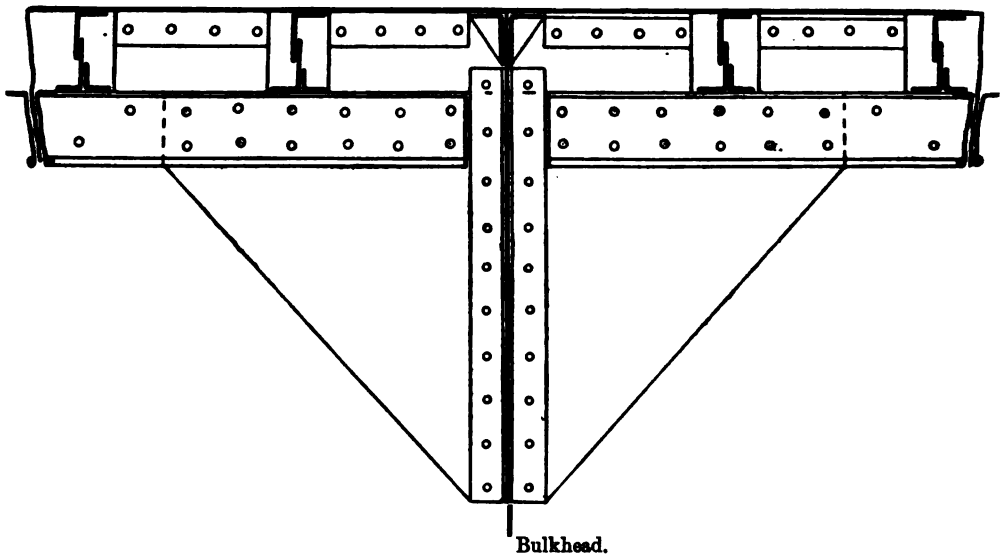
, A.—Stringer cut at a Bulkhead, and connected by large Brackets.
